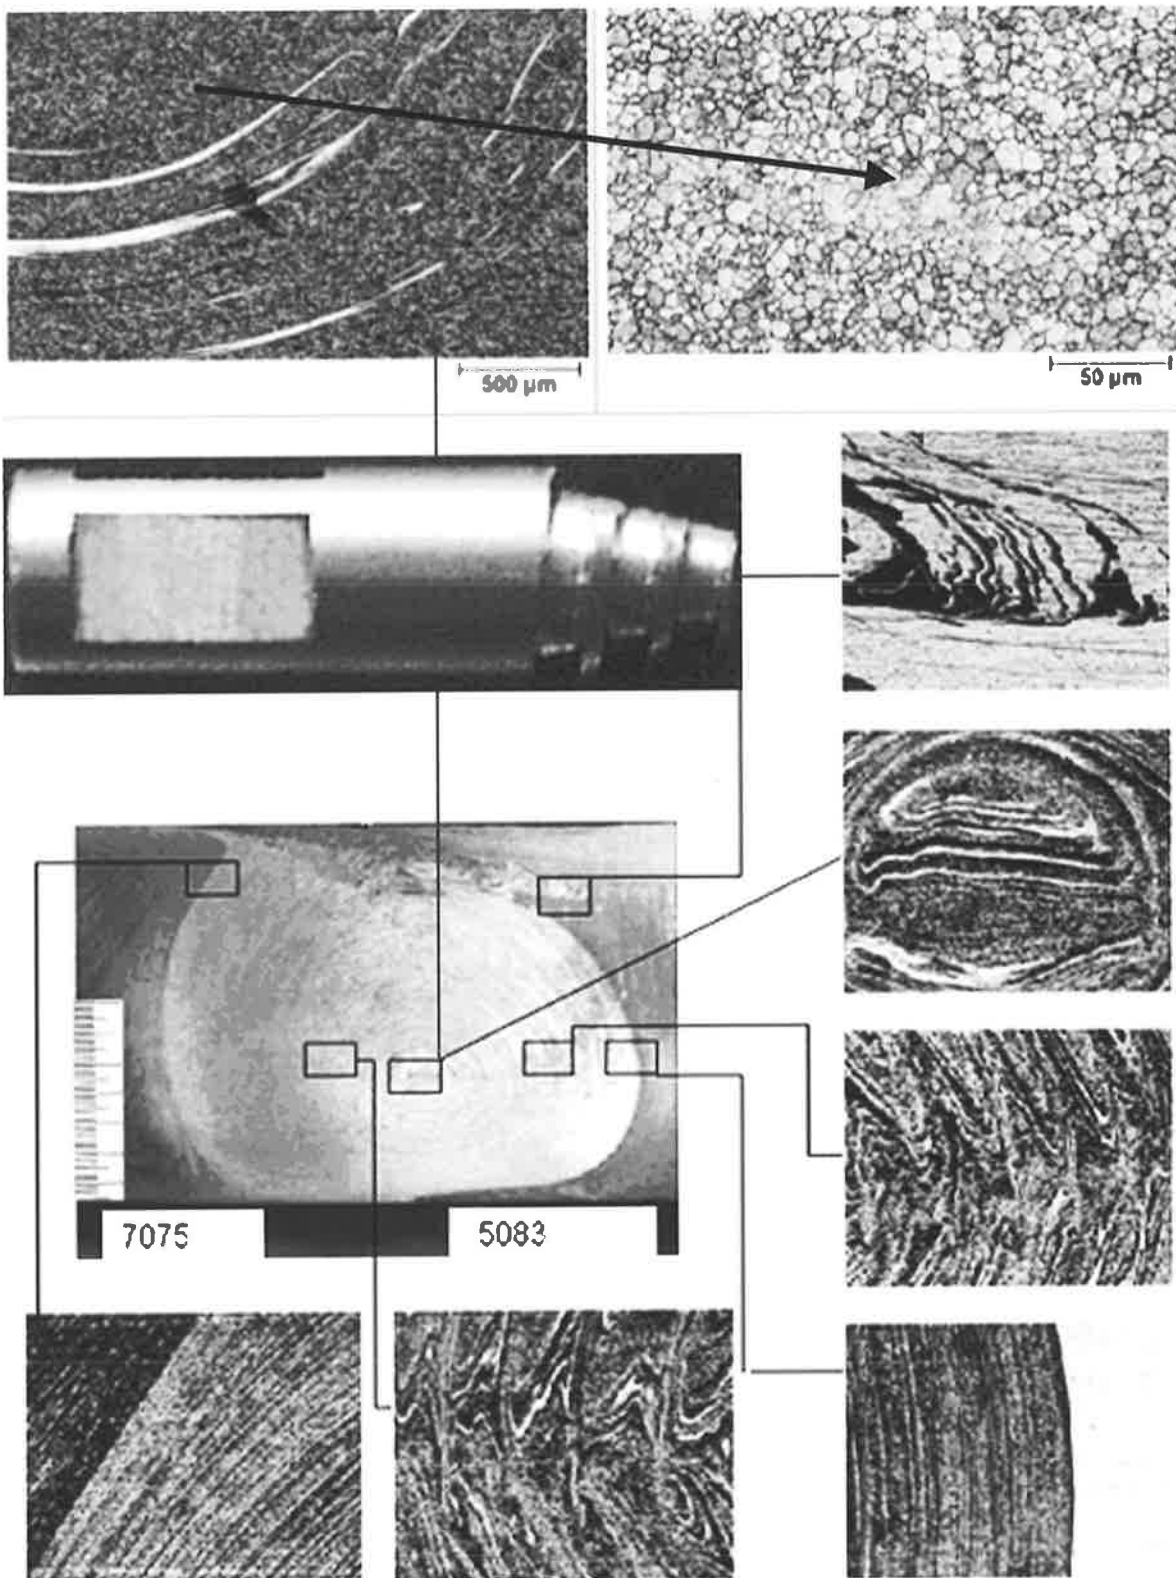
Weld pin (CT2-14), weld nugget and associated microstructure for weld 820A.
